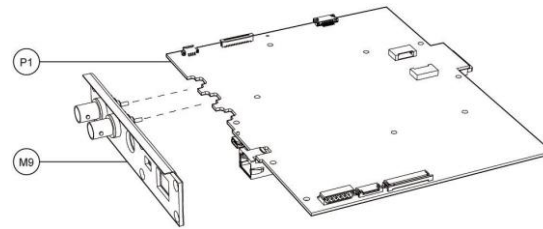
Assemble the Bracket Connector to the Mainboard PCB
